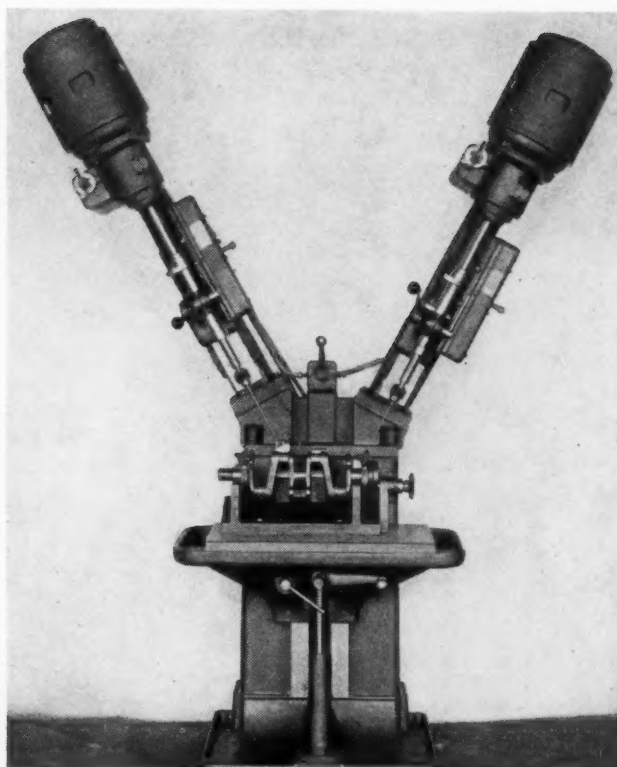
AUTOMATIC MACHINE FOR STEP DRILLING OIL HOLES IN AN AUTOMOBILE CRANKSHAFT
